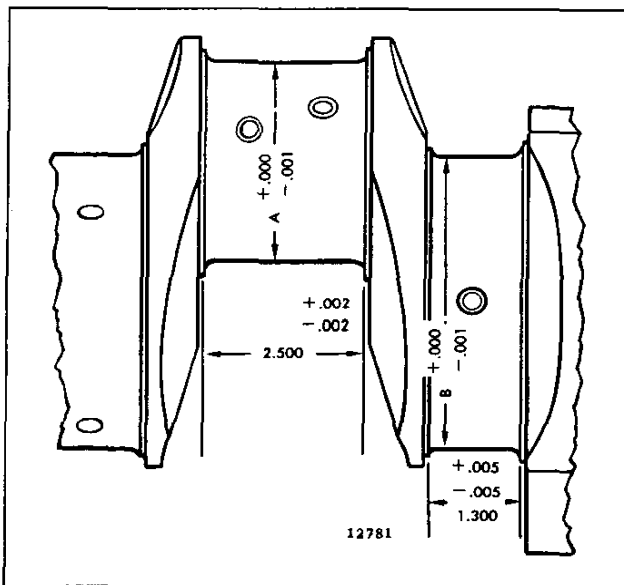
Dimensions of Crankshaft Journals - V-Type Engine
